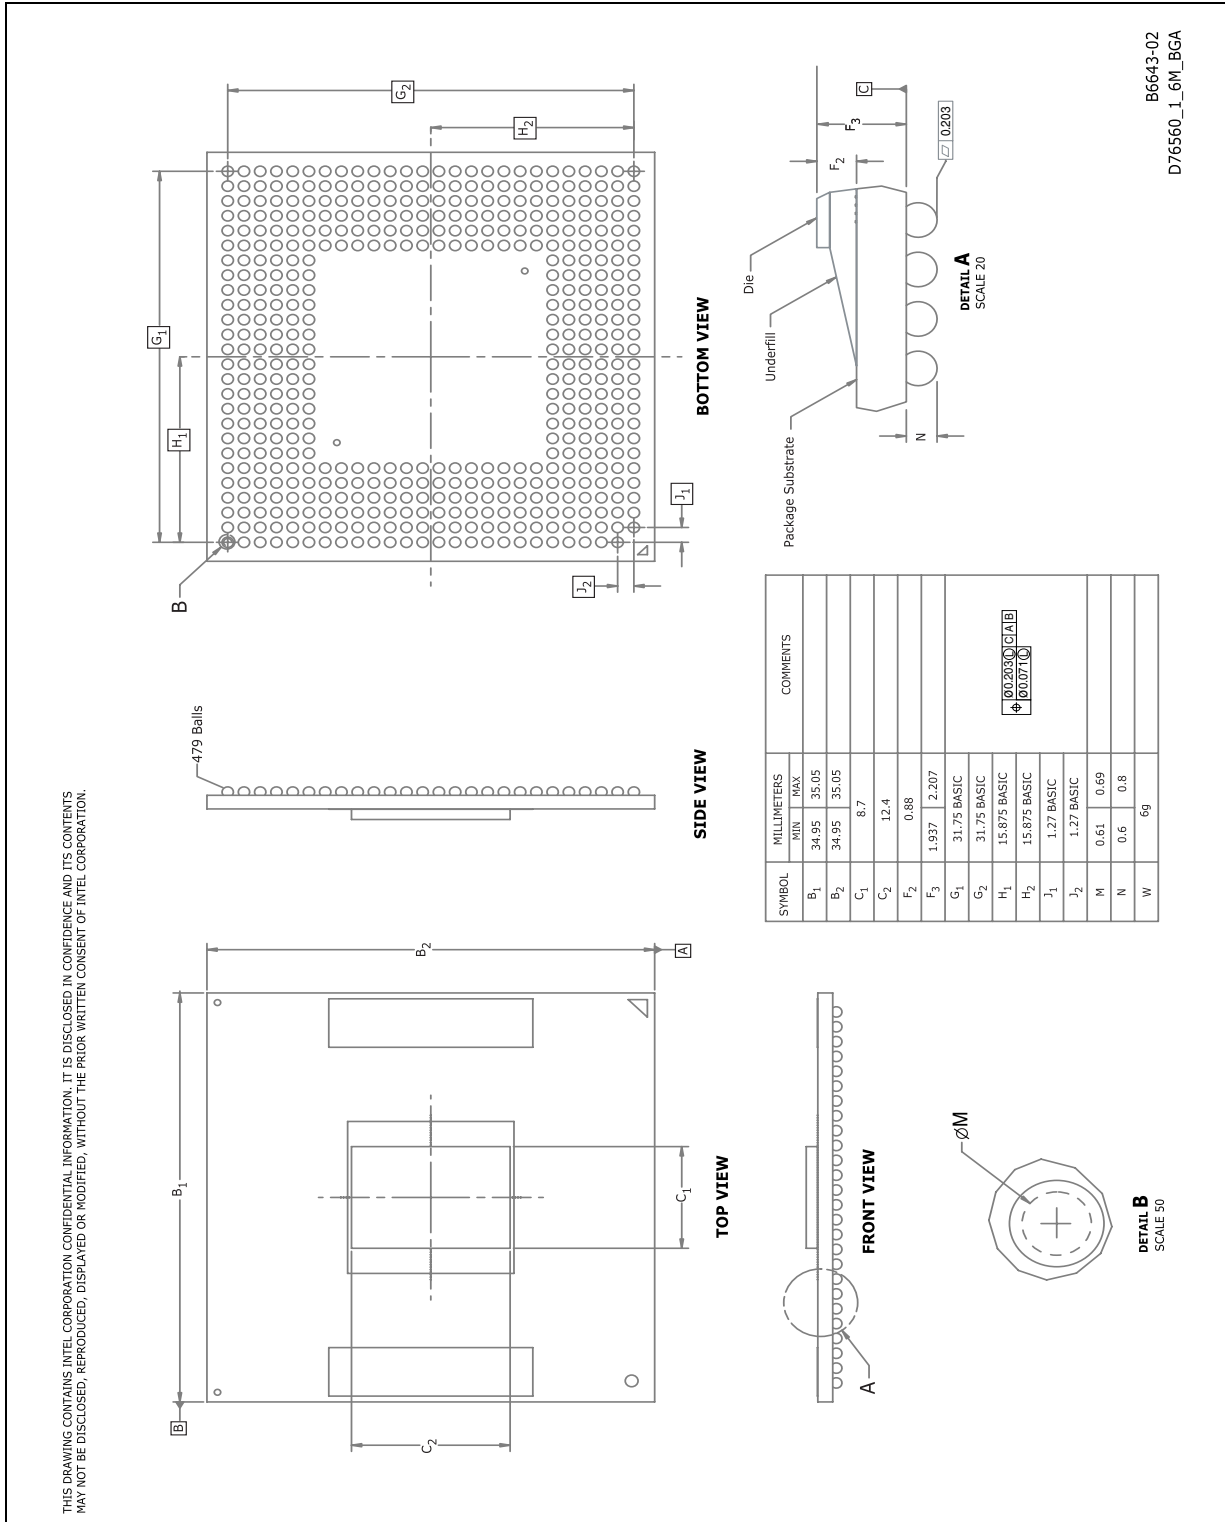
6-MB and 3-MB on 6-MB die Micro-FCBGA Processor Package Drawing (Sheet 2 of 2)
